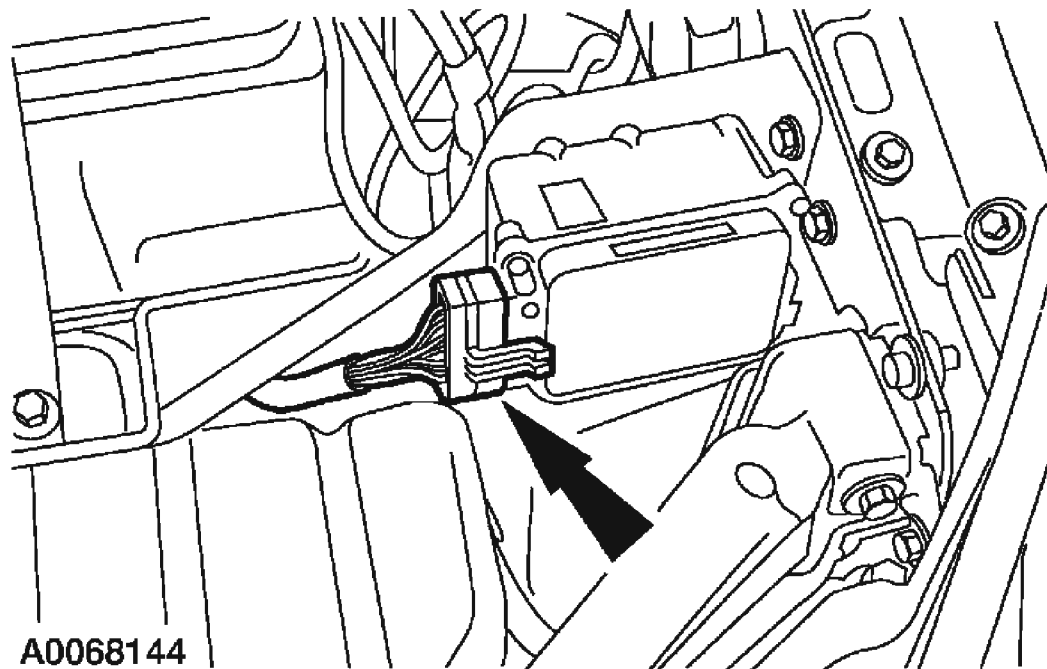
Disconnecting Speed Control Actuator Electrical Connector
